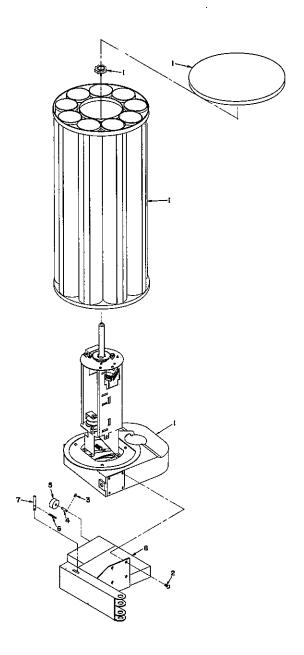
CUP DROP AND MOUNTING FRAME ASSEMBLY
